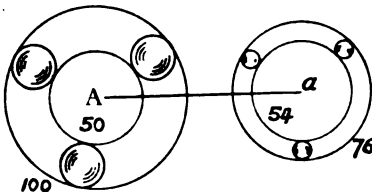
SHOWING DIFFERENT SIZED BALL BEARINGS COUPLED TOGETHER.
